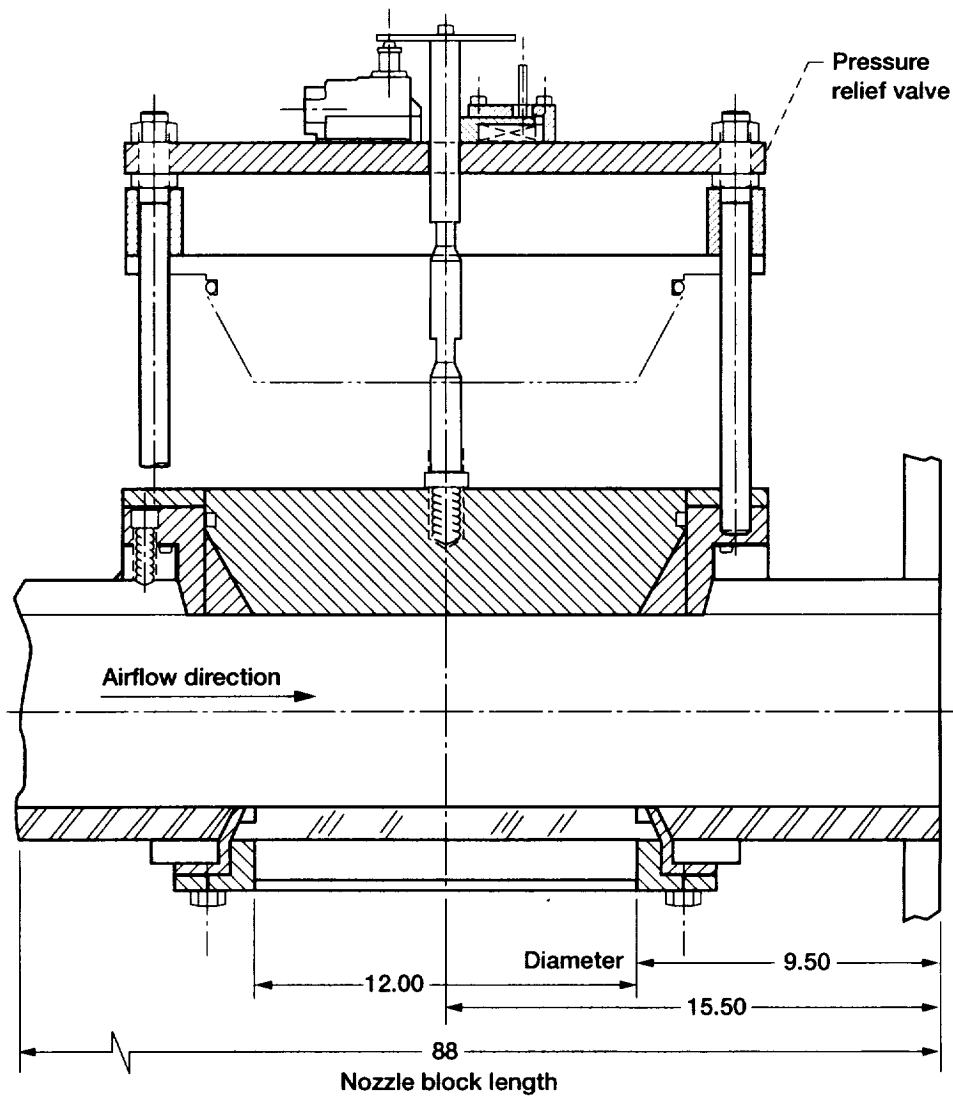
Elevation view of nozzle block section. All dimensions are in inches.
